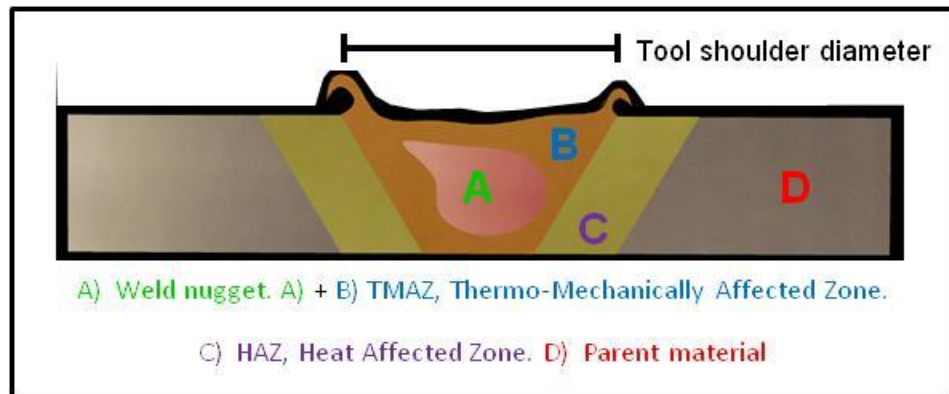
, Cross Section of an FSW Butt Weld, Detailing the Weld Regions.
